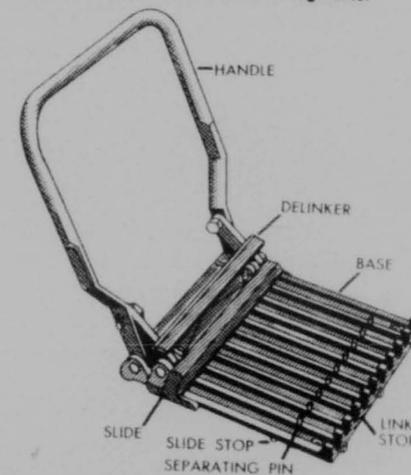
Link-Delinking Machine, Cal. .50, M7 (D7160003)-Showing Parts.
